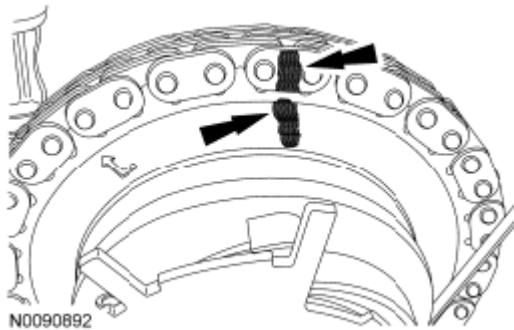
Locating Mark On Timing Chain And Camshaft Phaser And Sprocket Assembly
